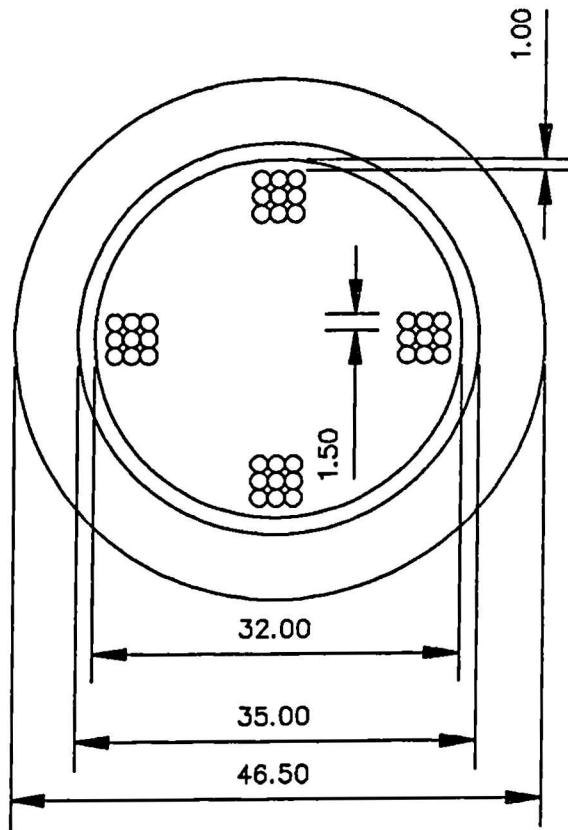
Principal dimensions and a cross-section through the constructed fixture.
